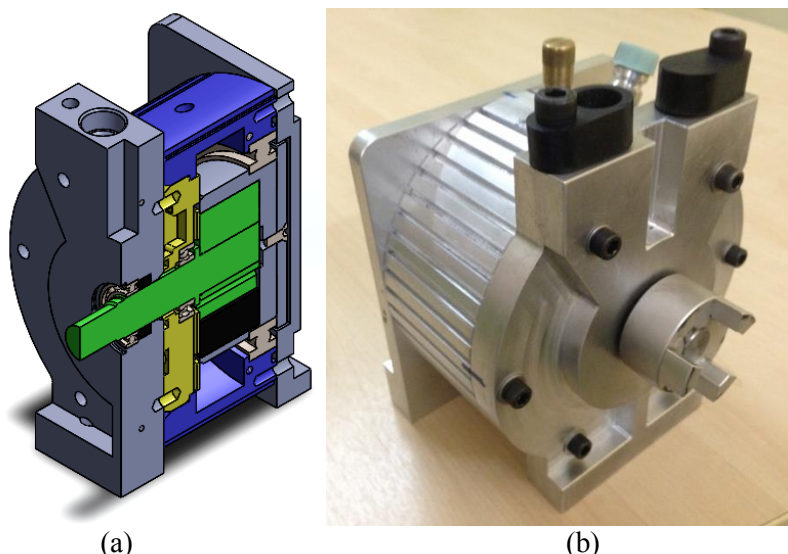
Isometric Sectioned drawing (a) and actual prototype model (b) of RSVR compressor
